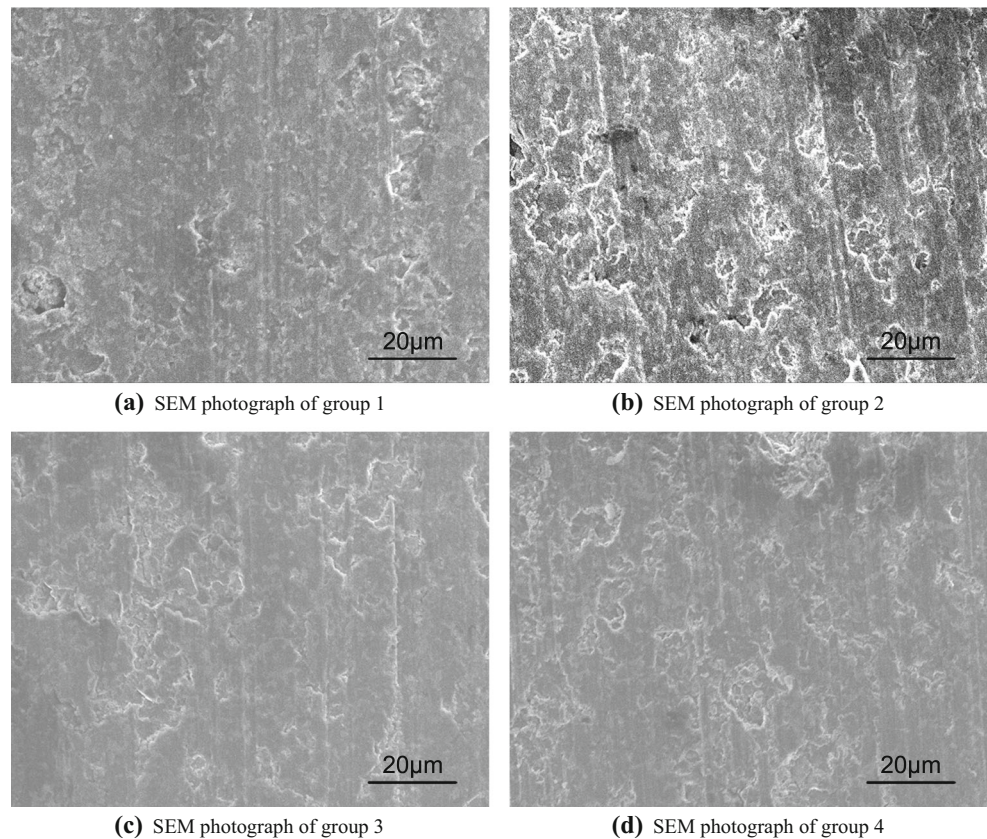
shows the surface morphology of the machined workpieces obtained at various processing conditions under scanning electron microscope (SEM). It clearly shows different degrees of grooves and micro grinding marks on the surface of the machined workpieces obtained at various processing conditions. Ridge crests induced by plastic deformation are obvious and tiny broken particles and squamous breaking traces can be seen on the surface of the grinding traces in group 1 and group 2, indicating that the material removal is mainly brittle fracture removal. Surface topography is relatively flat and uniform, and the grooves and pits are not obvious on the surface of the machined workpieces in group 3 and group 4, mainly because the removal of ZTA ceramic is mainly plastic removal mode under shallow grinding depth. Comprehensive comparison of the surface micro topographies of the four groups clearly proves the superiority of machining parameters determined by the mathematical control model. Among the four groups, the surface properties of group 3 are the best. The reason is that the generation and removal of oxide layer basically maintain in a balanced state under the actions of ultrasonic vibration and electrochemical reaction. Before achieving the critical grinding depth, the high frequency vibration of
